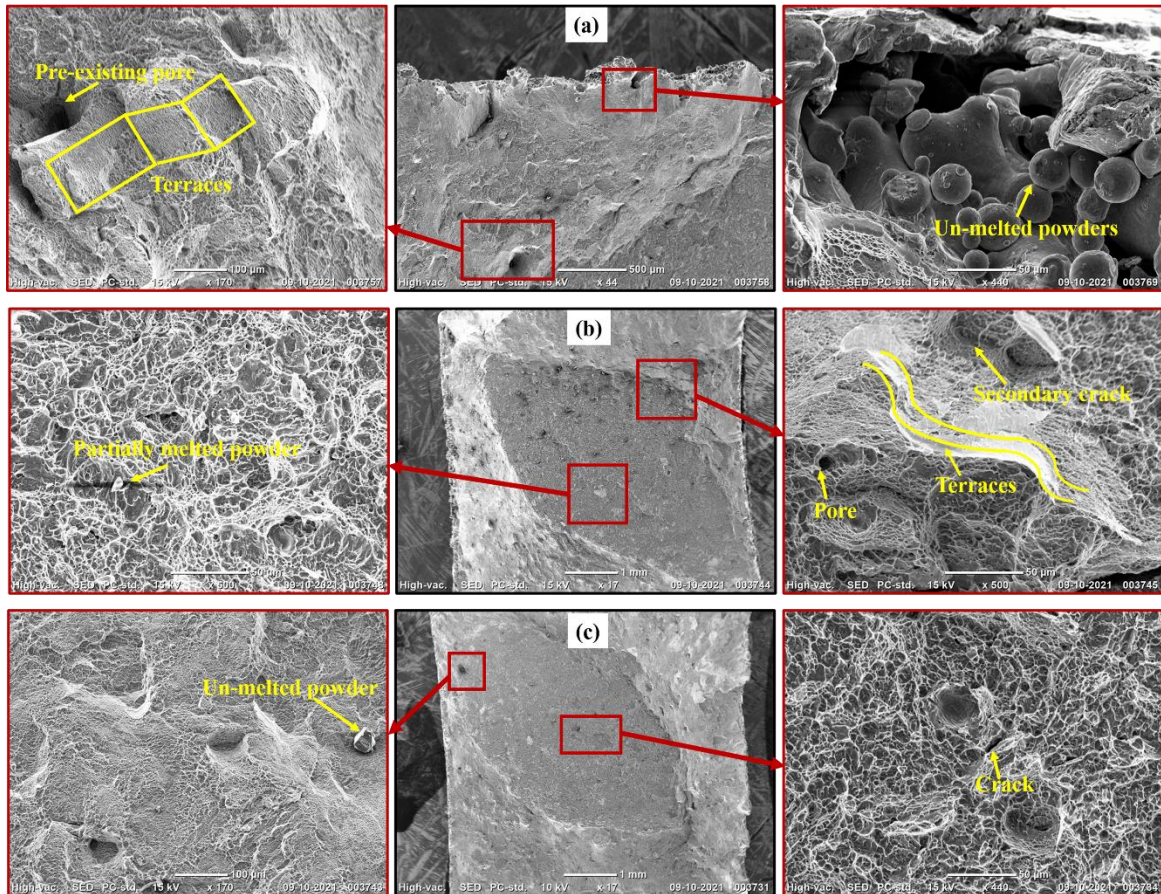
SEM micrographs of fracture surfaces of tensile test specimens illustrating the presence of defects corresponding to the (a) HT-0°, (b) HT-45°, and (c) HT-90° samples
